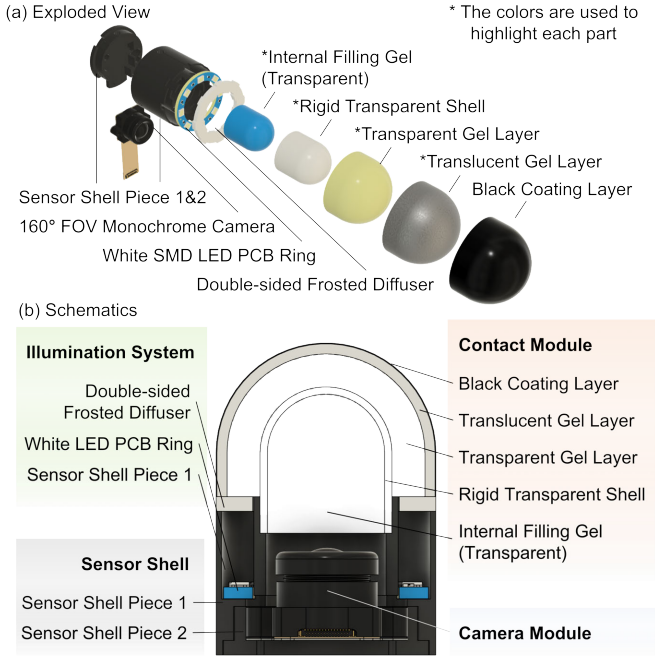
R-Tac0 Sensor Design. (a) Exploded view of the sensor. (b) Schematic diagram of the four key components in the assembled R-Tac0 sensor.
